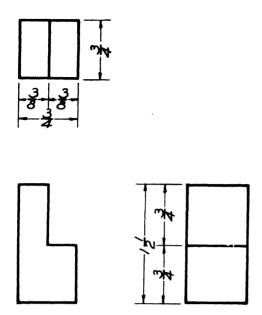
DIMENSIONING A THREE-VIEW DRAWING
